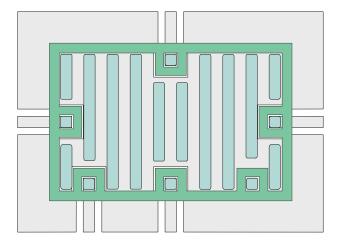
Solder Stencil and Solder Mask Overlaid on Land Print.
